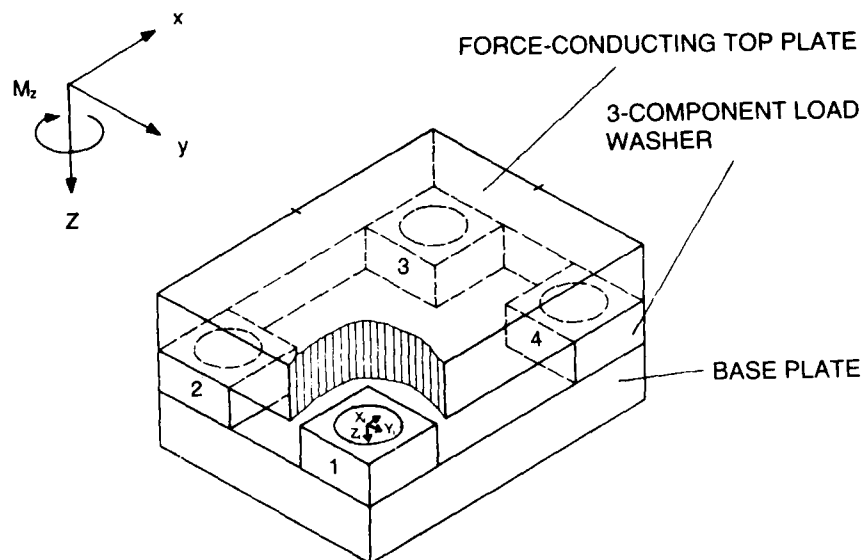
SCHEME OF THE MULTICOMPONENT PIEZO-BALANCE
